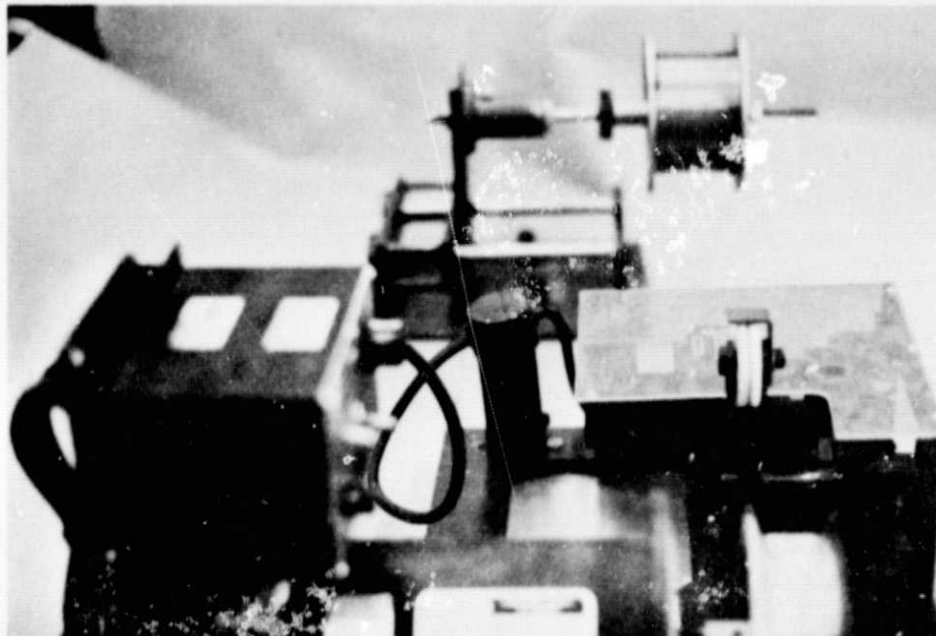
Spool Rewinder Set. A factory wire spool is seen on the feed spindle adapter in the rear. Wire tension on the take-up spool (foreground) is controlled by setting the drag on the feed spindle.
